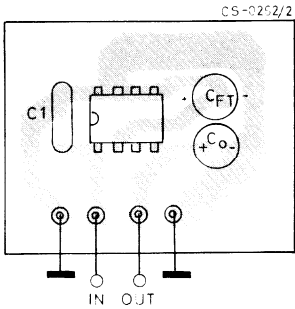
P.C. board and component layout of fig. 1 (1 : 1 scale)
